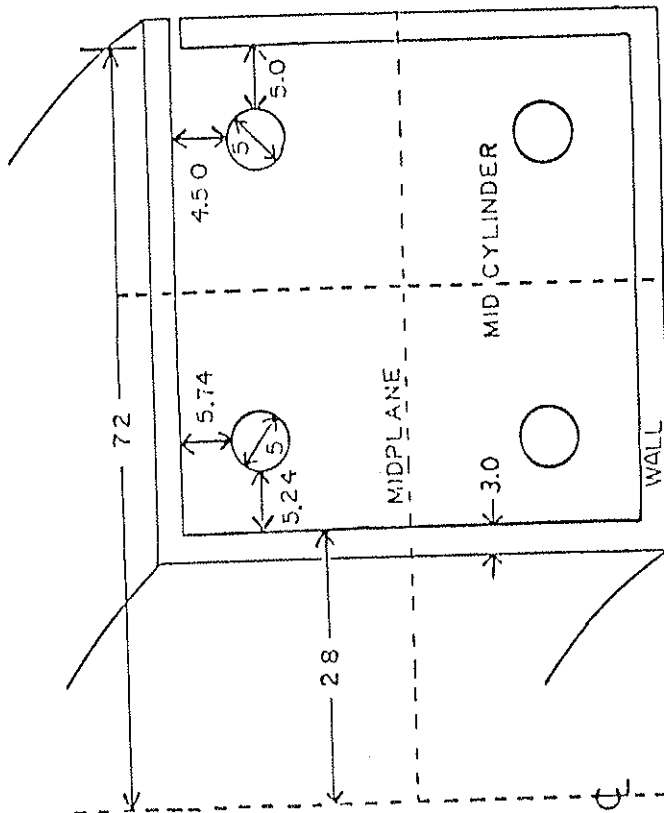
Cross section of vacuum vessel showing internal rings.
